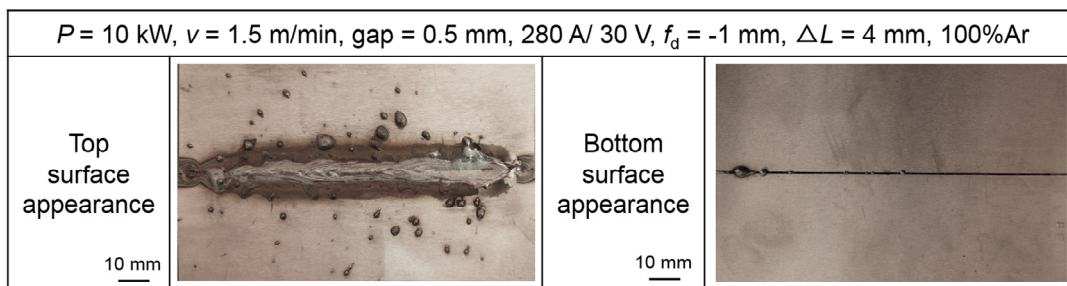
Top and bottom surface appearances of hybrid weld bead produced by laser-MIG arc hybrid welding in 100%Ar shielding gas.
